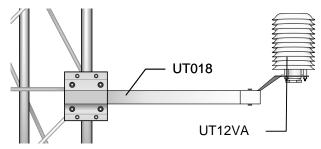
UTLI Leveling Fixture/Crossarm Mount and UT018
